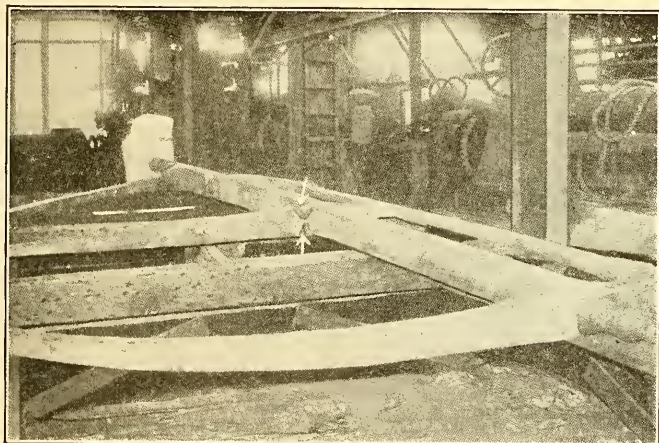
Rudder Frame Ready for Welding.
